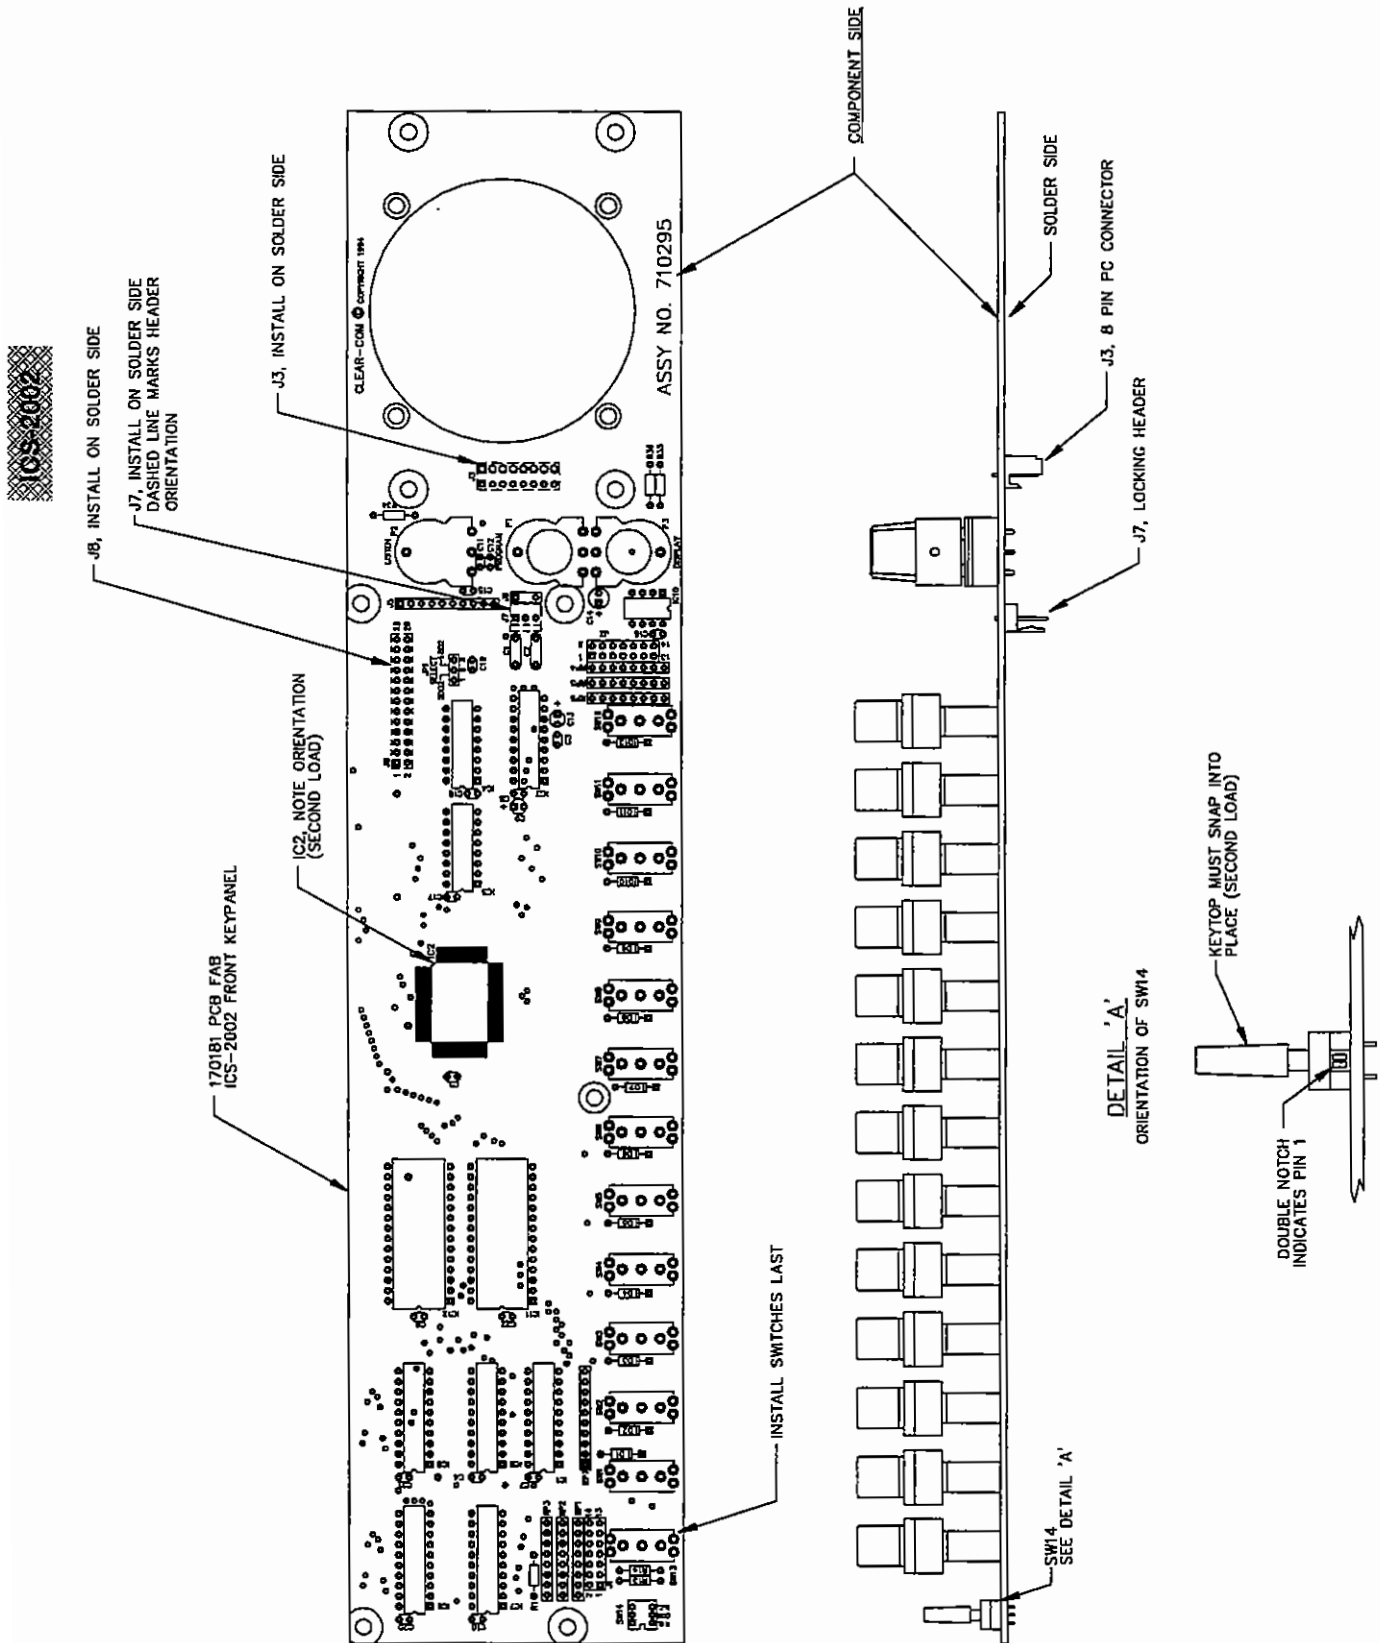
Assembly Drawing - ICS-2002 Front Panel PCB Rev. A
